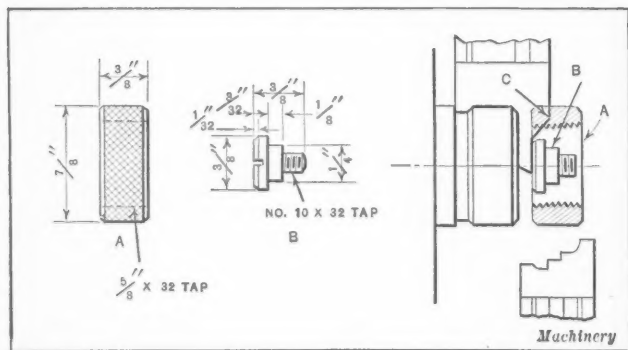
Details of Two Screw Machine Products and Diagram illustrating Methods of making One Piece from the Core of Another
